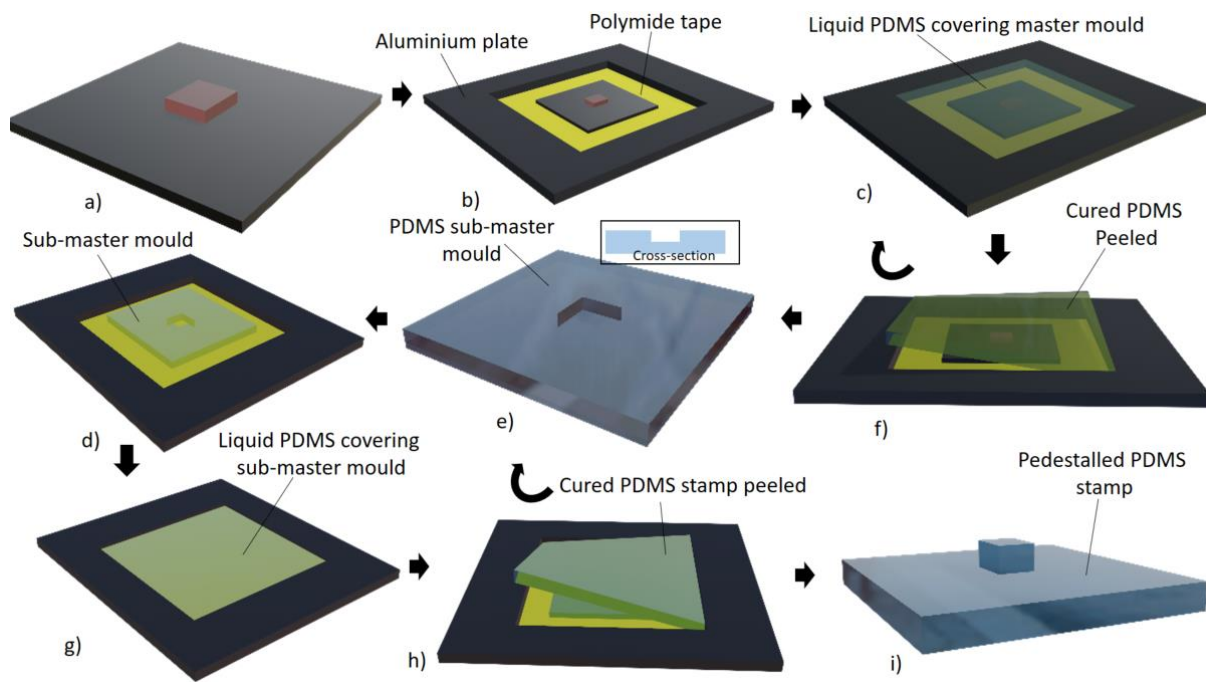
PDMS stamp casting fabrication steps a) SU-8 master mould b) master mould attached to the casting container made from polyimide taped on aluminium plate c) casting liquid PDMS over master mould d) Cured PDMS sub-master mould peeled off the casting container e) PDMS sub-master mould reversed f) sub-master mould attached to the casting container g) casting liquid PDMS over sub-master mould h) Cured PDMS stamp mould peeled off the casting container i) Pedestalled PDMS stamp
